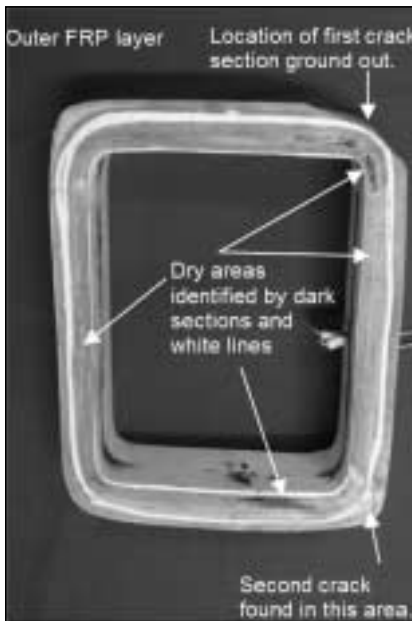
Showing cross section of boom with resin depleted or dry glass areas and location of cracks.
